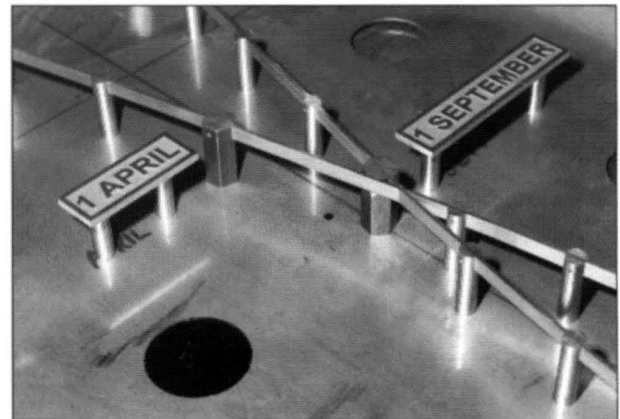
Crossover of analemma lobes, showing mounting detail. All location holes are laser cut.
